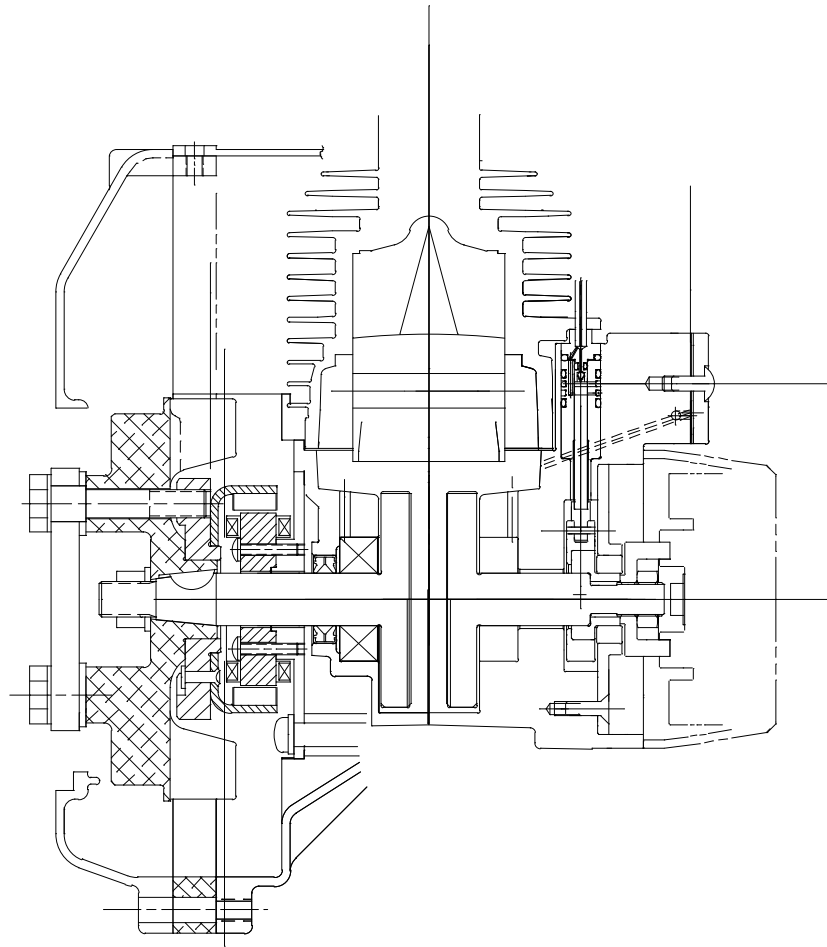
Utility Engine, Cross Section Through Crankcase, Flywheel, Alternator and Pump
